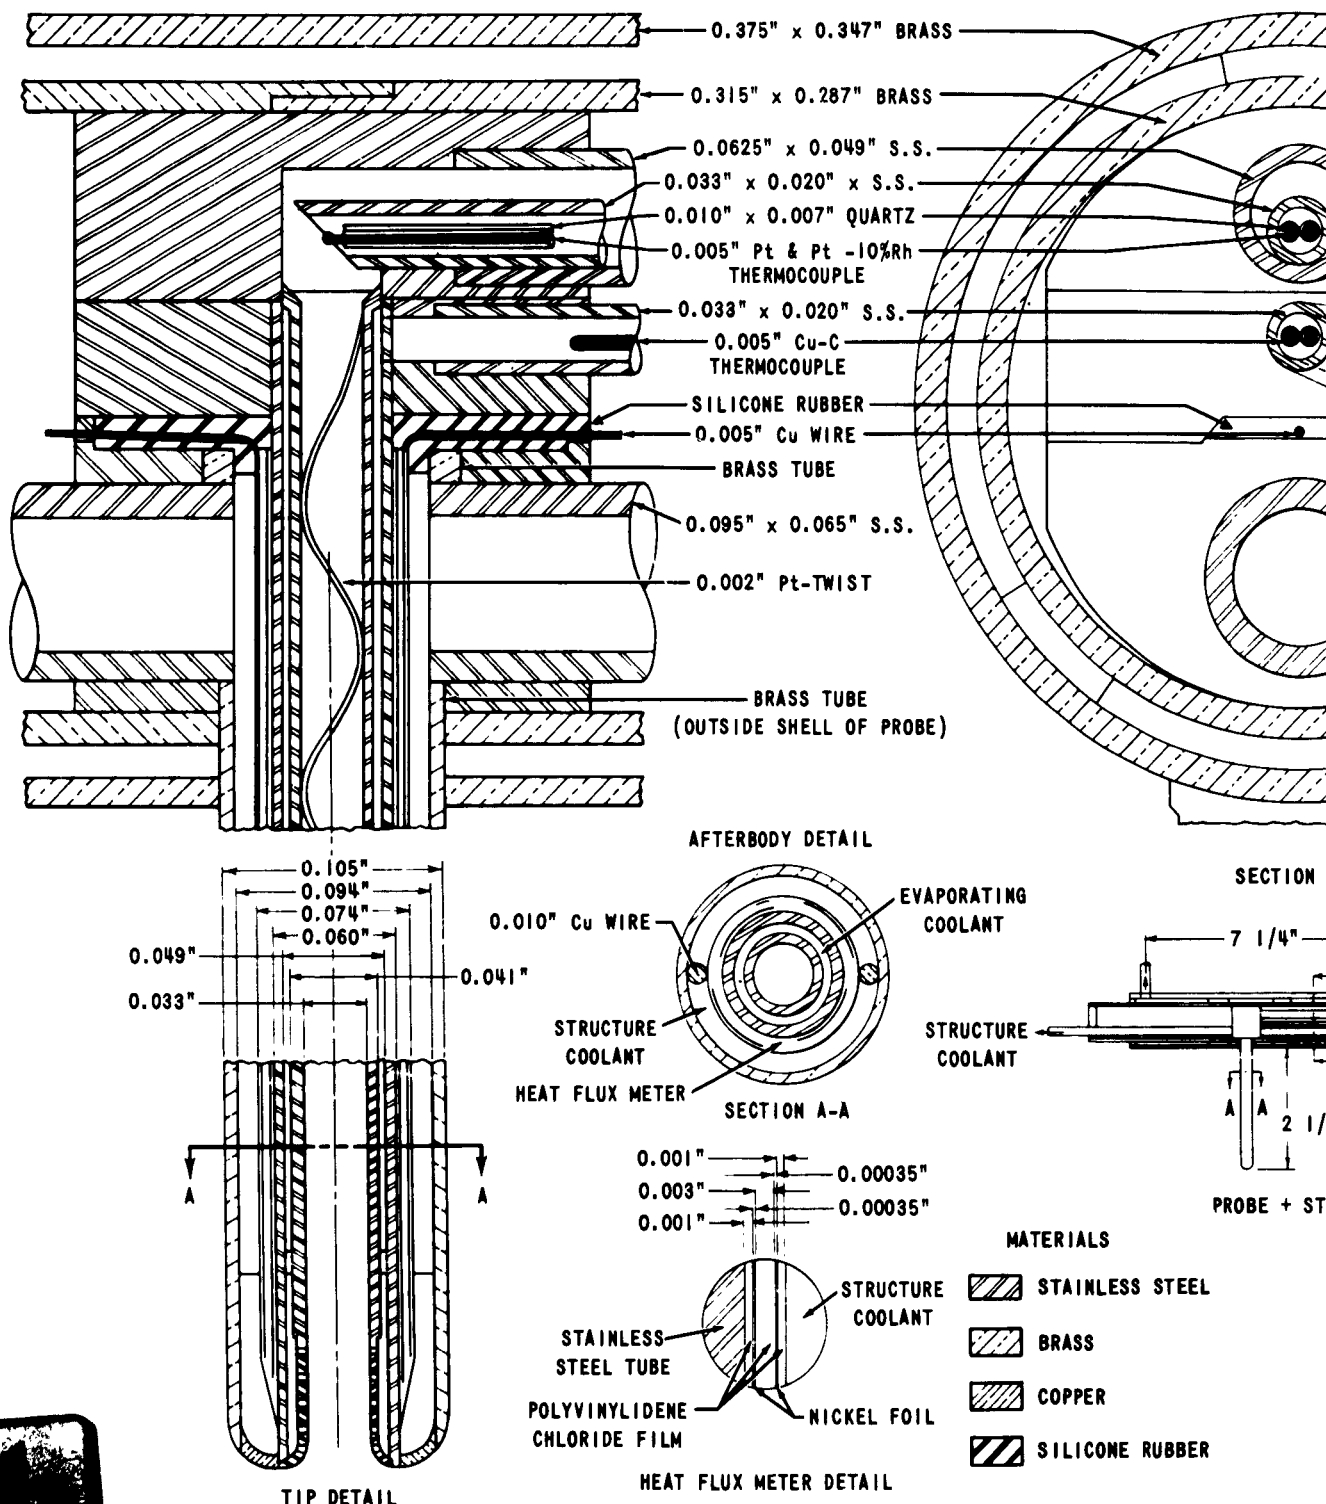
ASSEMBLY DRAWING OF RESEARCH MODEL
